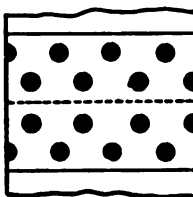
Double-riveted butt-joint zigzag riveted.
